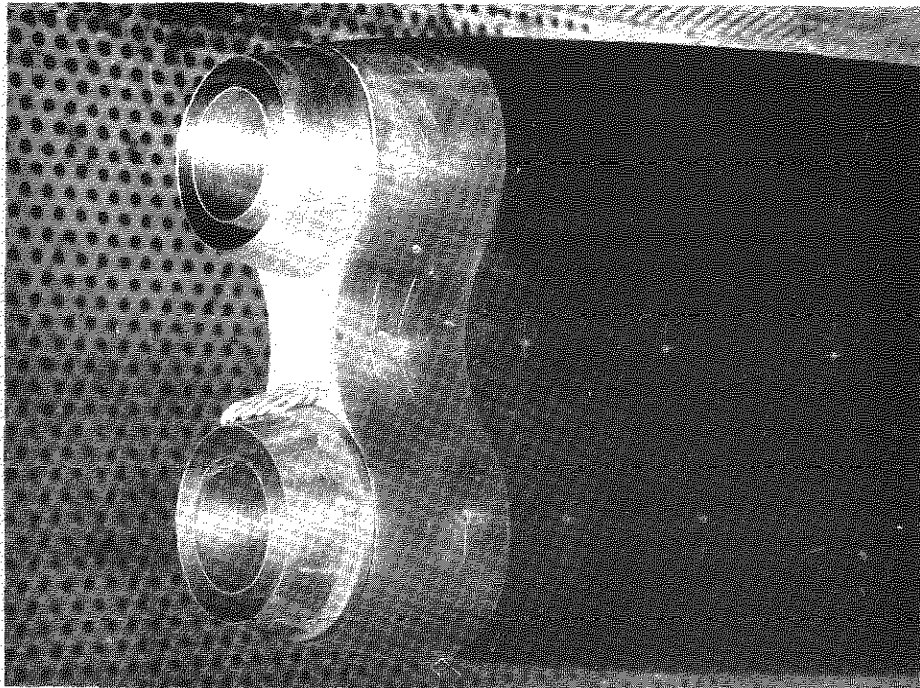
(a.) TYPICAL NOZZLE SHROUD ASSEMBLY
